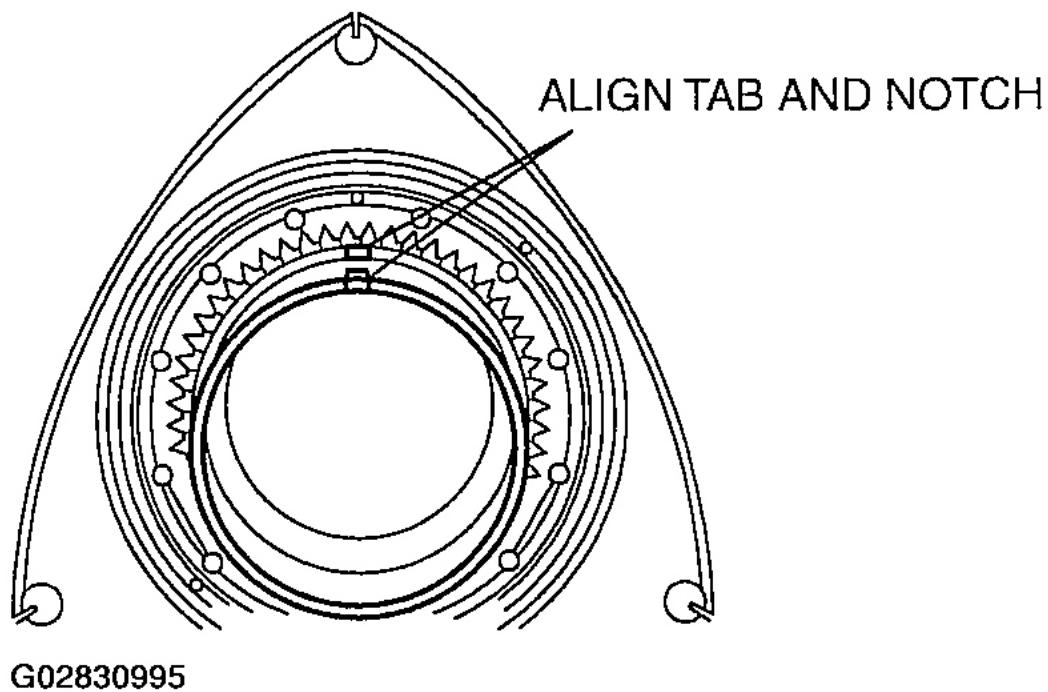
Aligning Rotor Bearing Tab & Rotor Notch
